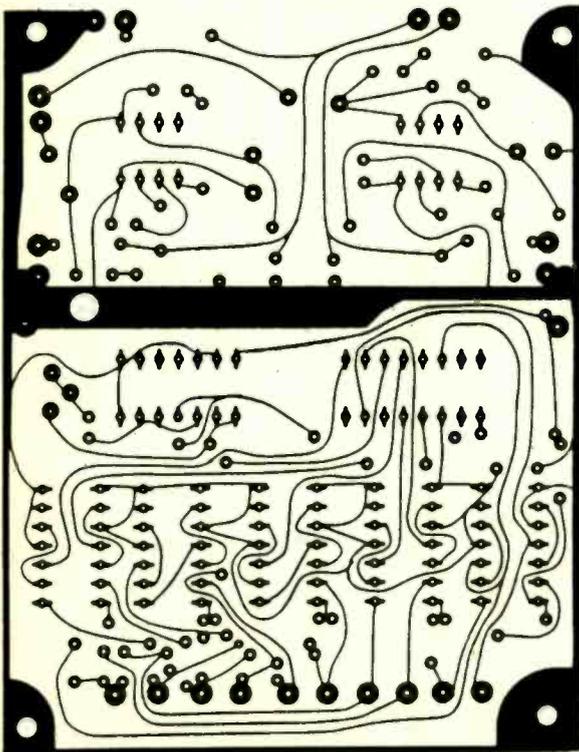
WHILE TUNER CAN BE HAND-WIRED, a printed-circuit board (left) will make for neater construction.
